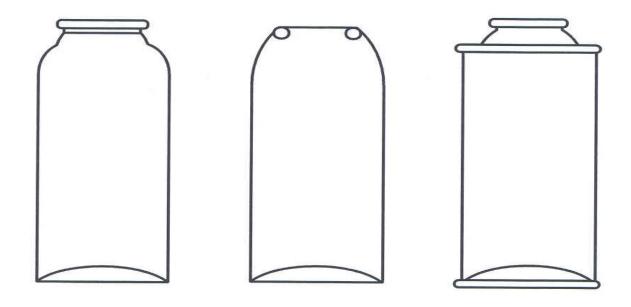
Two impact-extruded aerosol can designs (left, center)and a three-piece welded-steel aerosol can(right). All aerosol cans have bottoms that are domed upward against internal pressure
